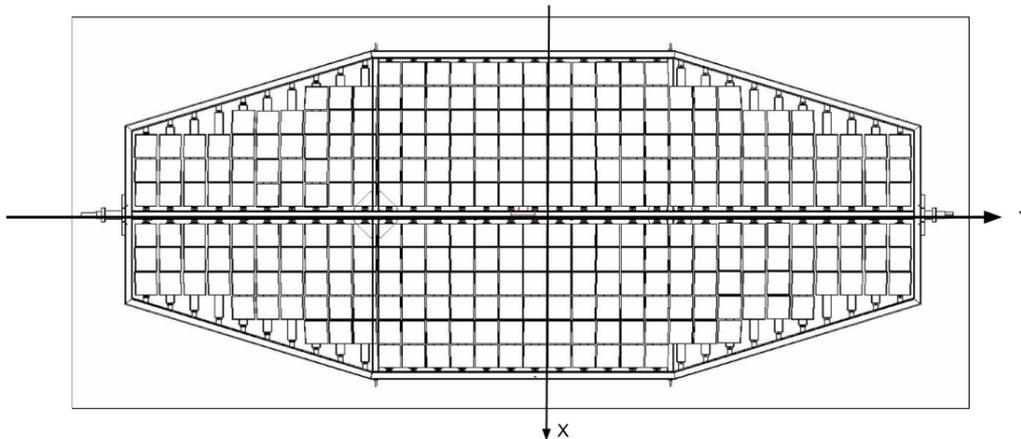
Top view schematic drawing of the M-H concentrator panel.
